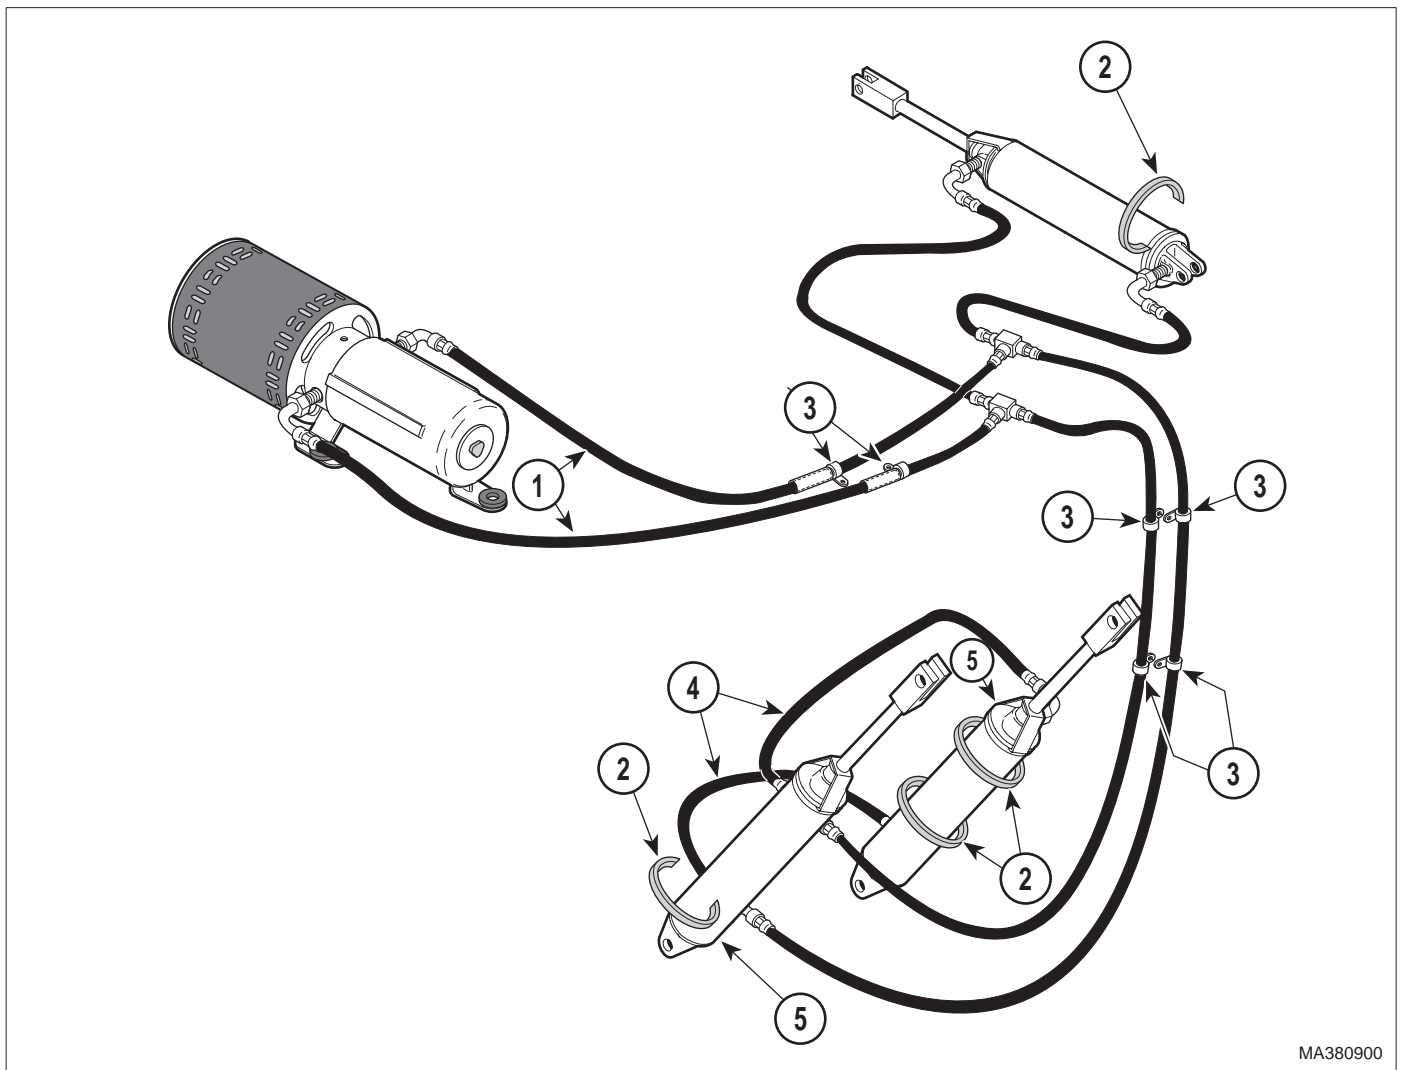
Hydraulic Return and Power Hose Removal / Installation
